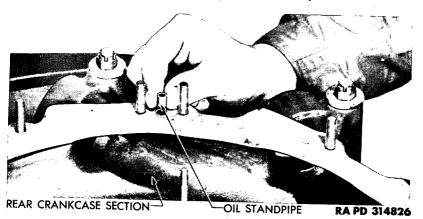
Installing Oil Standpipe in Rear Crankcase Mounting Flange
